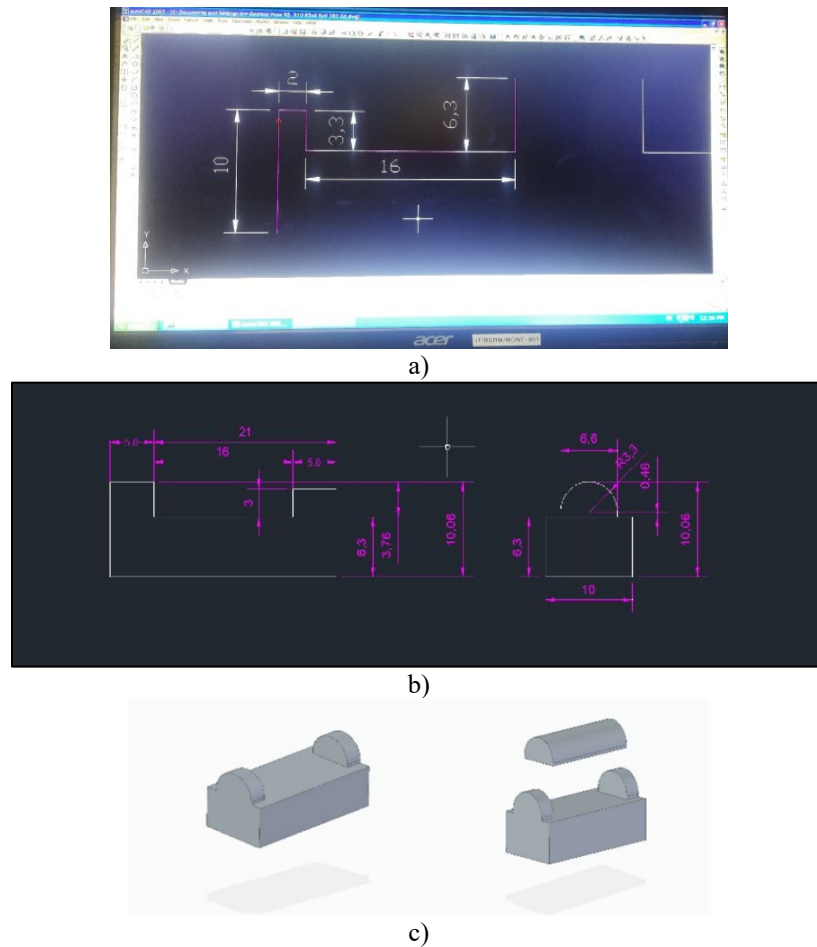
a) CAD/CAM path b) machining path generated by software and c) isometric view of the workpiece before and after machining
